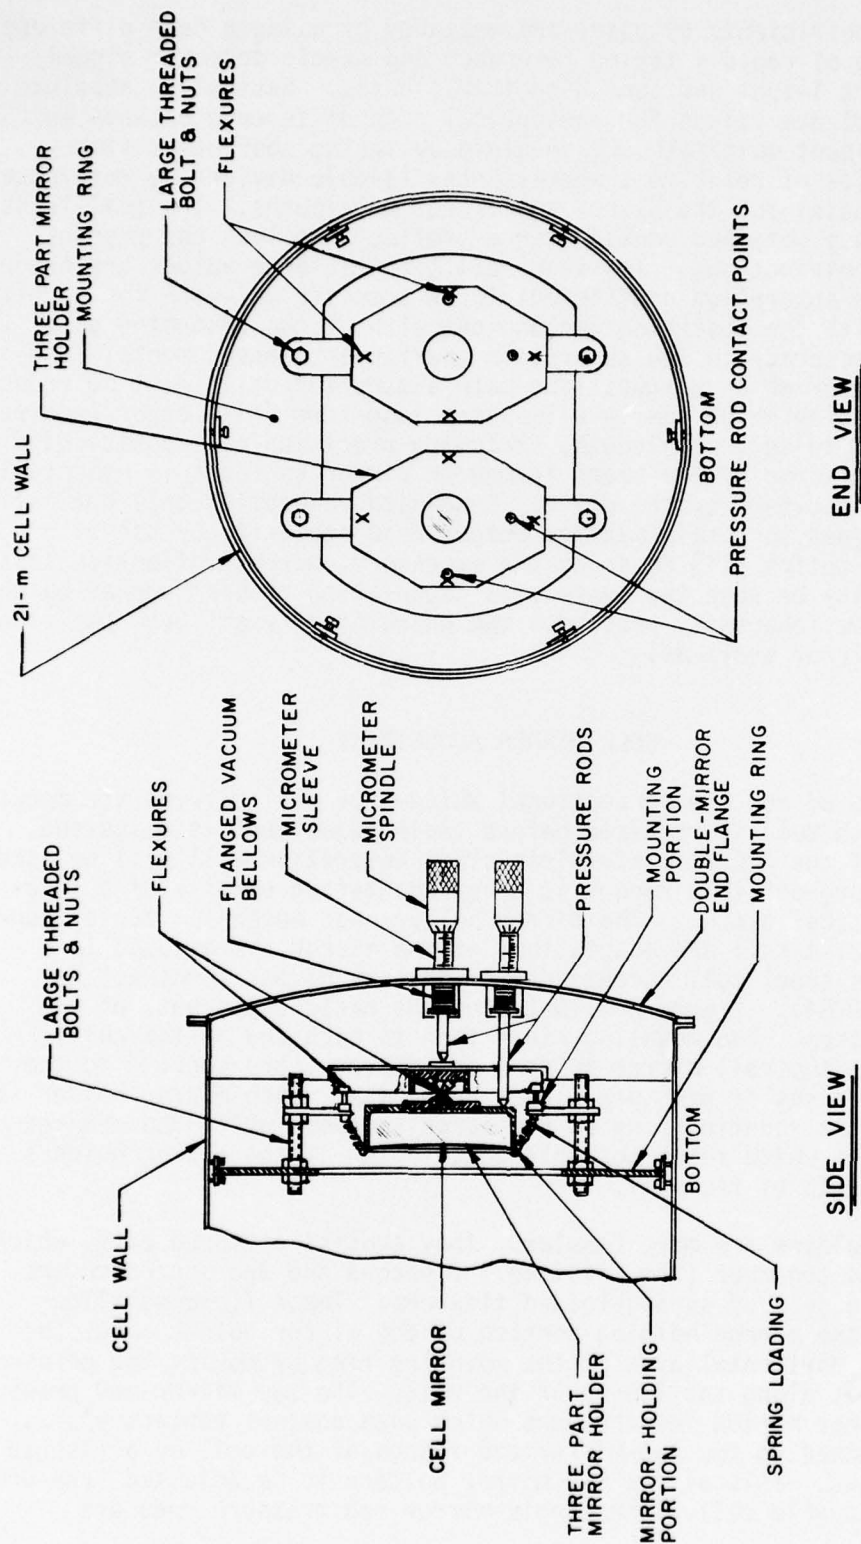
End and side views of mounting ring, three-piece mirror holders with spring loaded flexures, and double-mirror end cell flange with flanged vacuum bellows and pressure rods.
